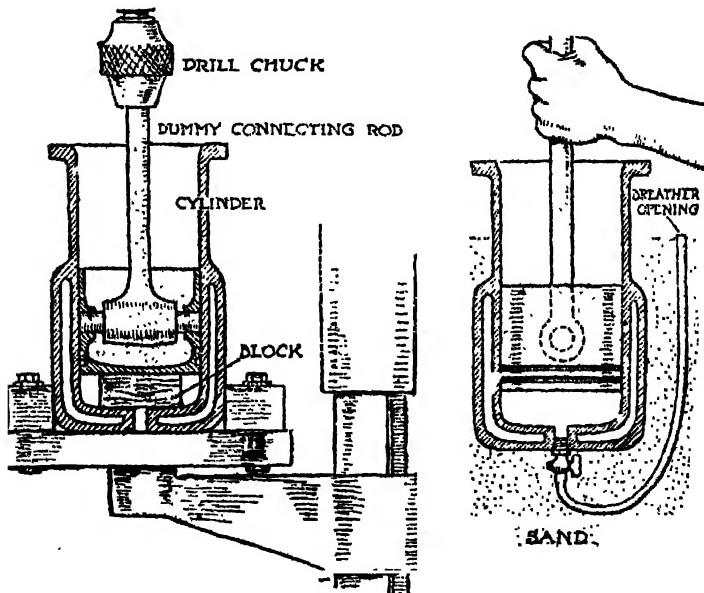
Outlining Use of Dummy Piston and Connecting Rod for Lapping Out Fine Scratches in Cylinder Bore.
